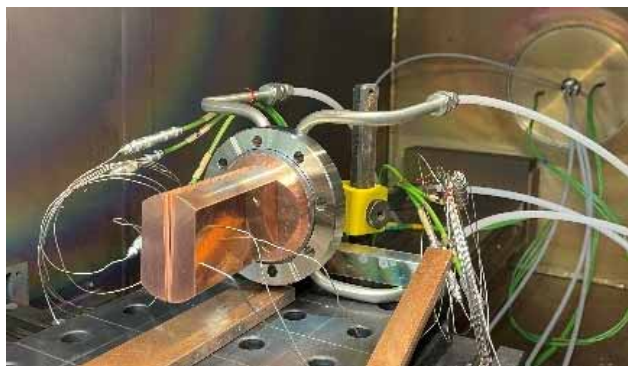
Prototype tested in e-beam welding chamber.
